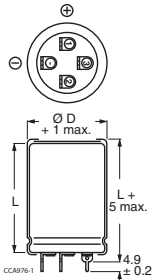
Printed wiring pin version (Case Ø D = 35 mm)
